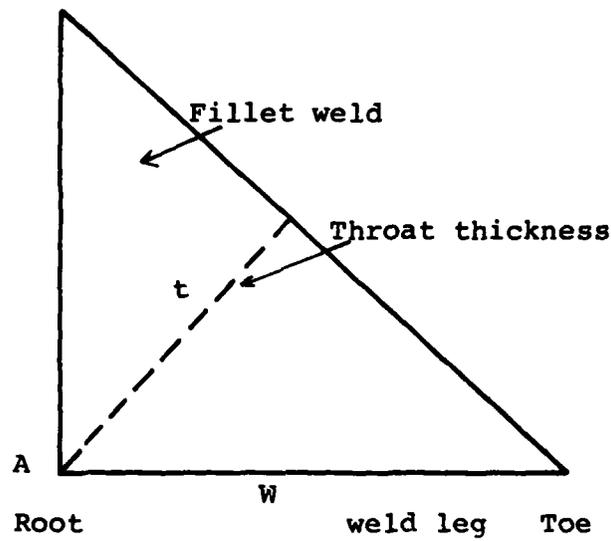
DEFINITION OF BASIC PARAMETERS IN FILLET WELDS
